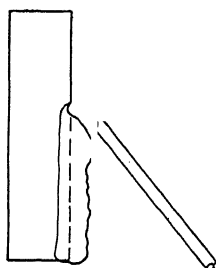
Do not point the electrode up into the puddle in making a vertical weld.
